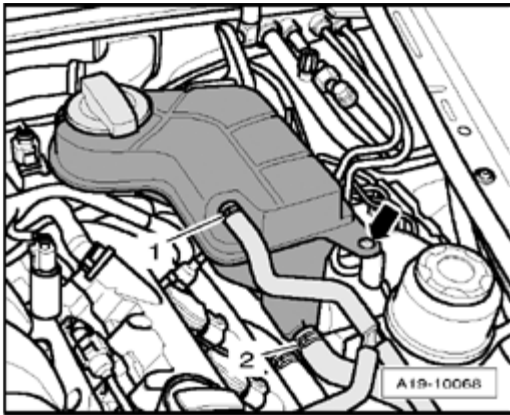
Removing Coolant Hoses At Coolant Expansion Tank
